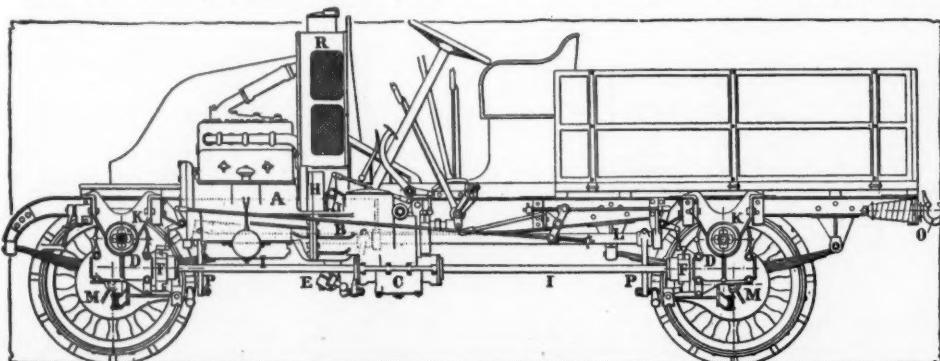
The Latil tractor-truck with four-wheel driving and steering
